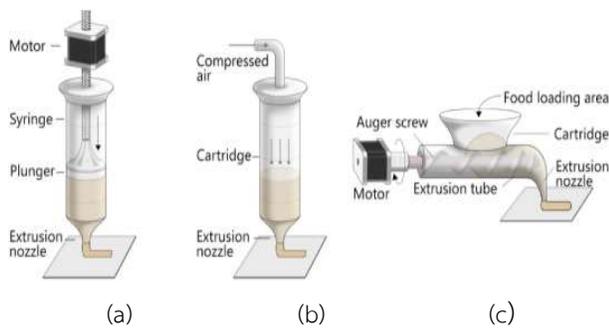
Extrusion-based printing mechanisms: (a) Syringe-Based Extrusion, (b) Air Pressure Driven Extrusion, (c) Screw-Based Extrusion
